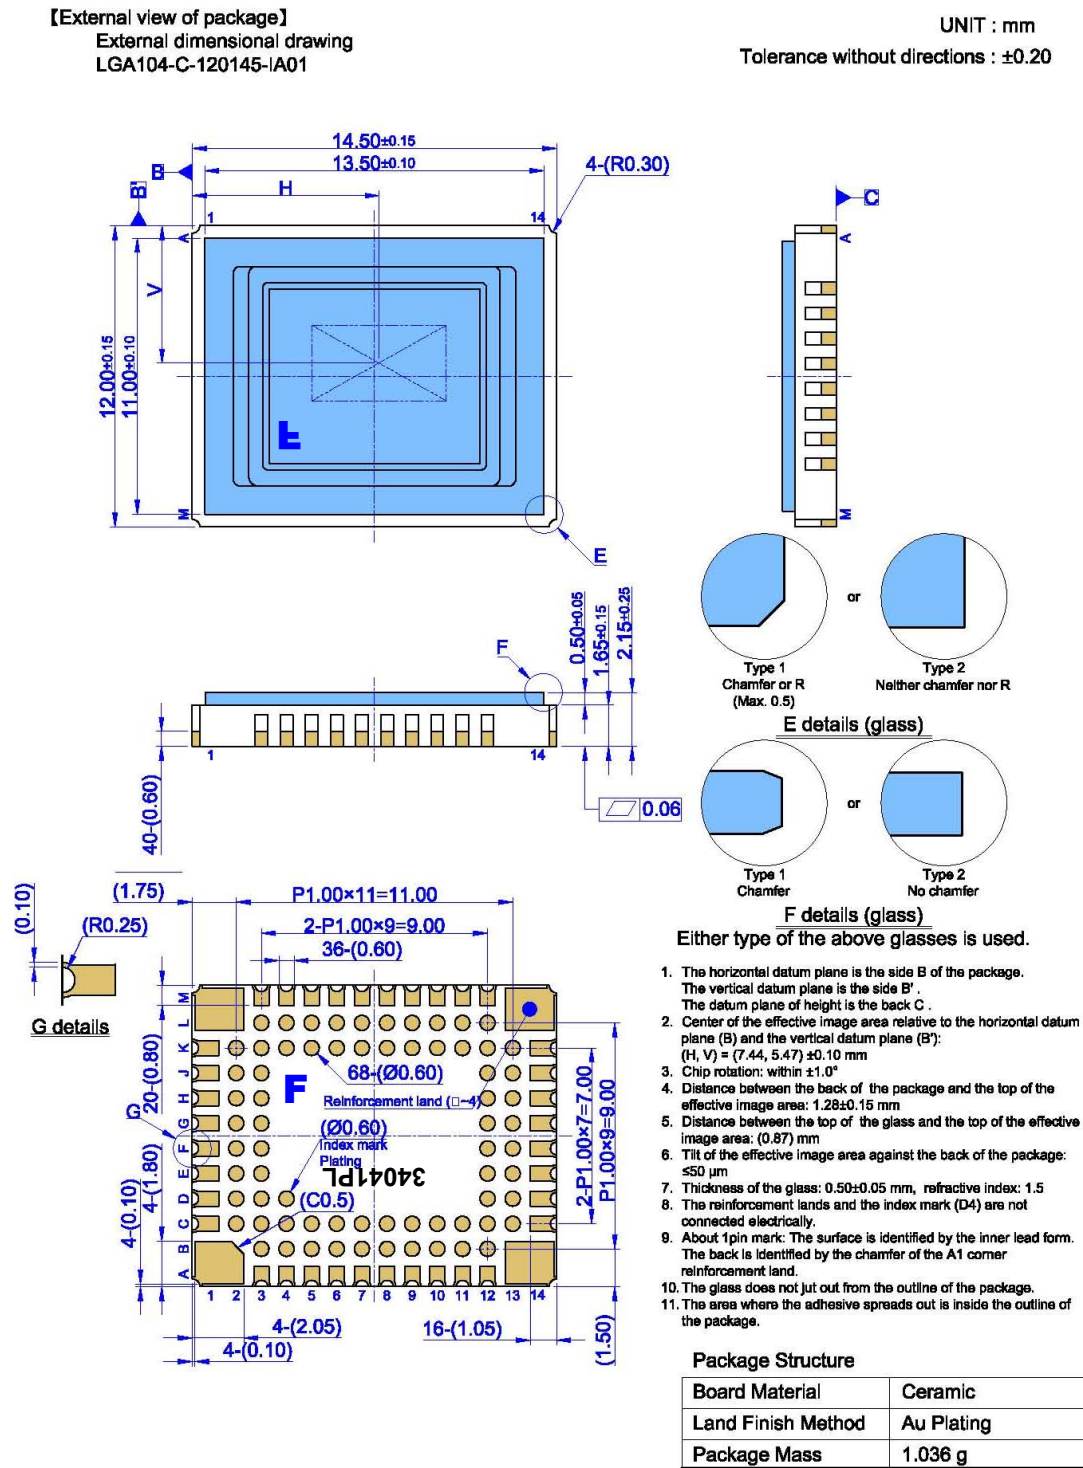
Package Dimensions (LGA104-C-120145-1A01)
